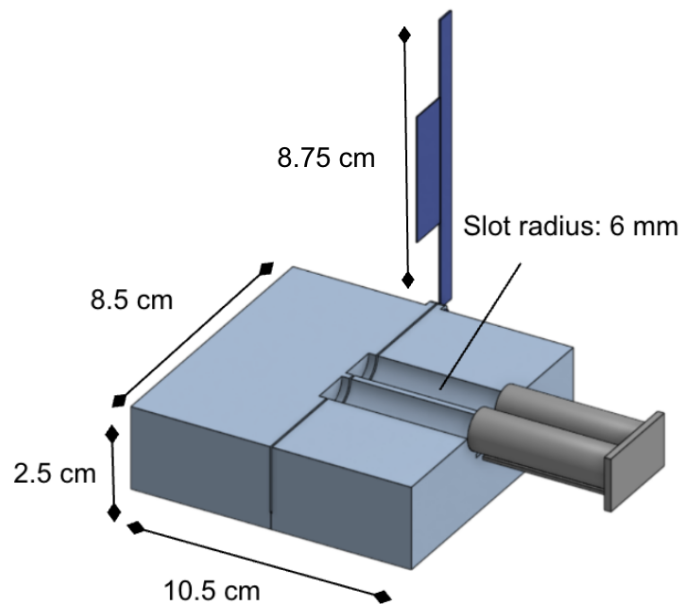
Paper Cutter Design with dimensions [Gianna Inga]
